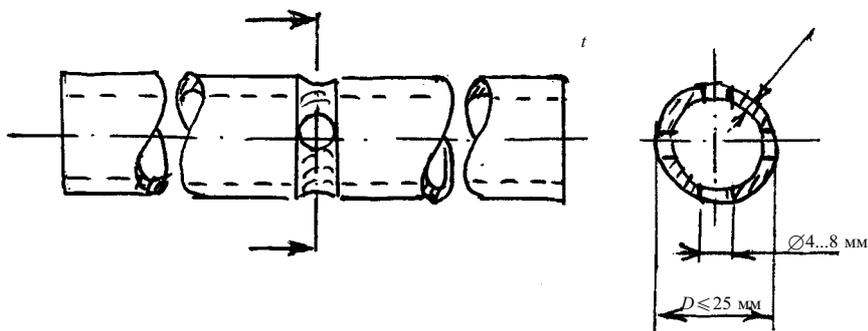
Tension test specimen with 4 holes for testing butt joints of small diameter pipes
